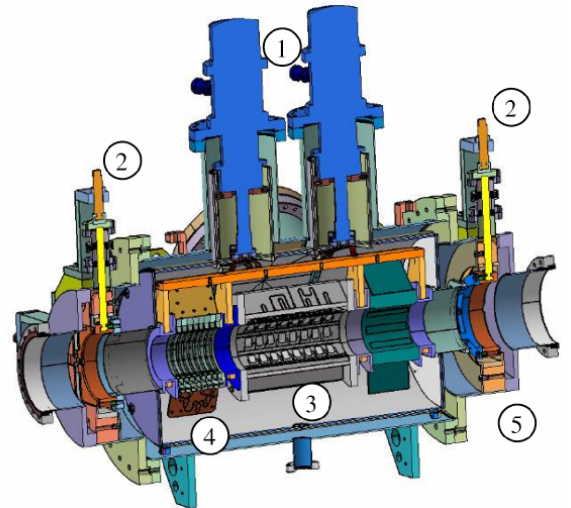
Layout of the stochastic cooling test-tank: (1) cold heads, (2) x-y support, (3) printed loops, (4) ring slot coupler, (5) thermal shield. Tank length: 1.15 m flange to flange.
